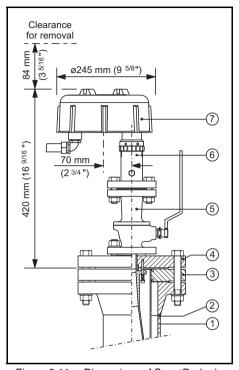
Dimensions of SmartRadar installed in 4" SCH10s insert pipe
